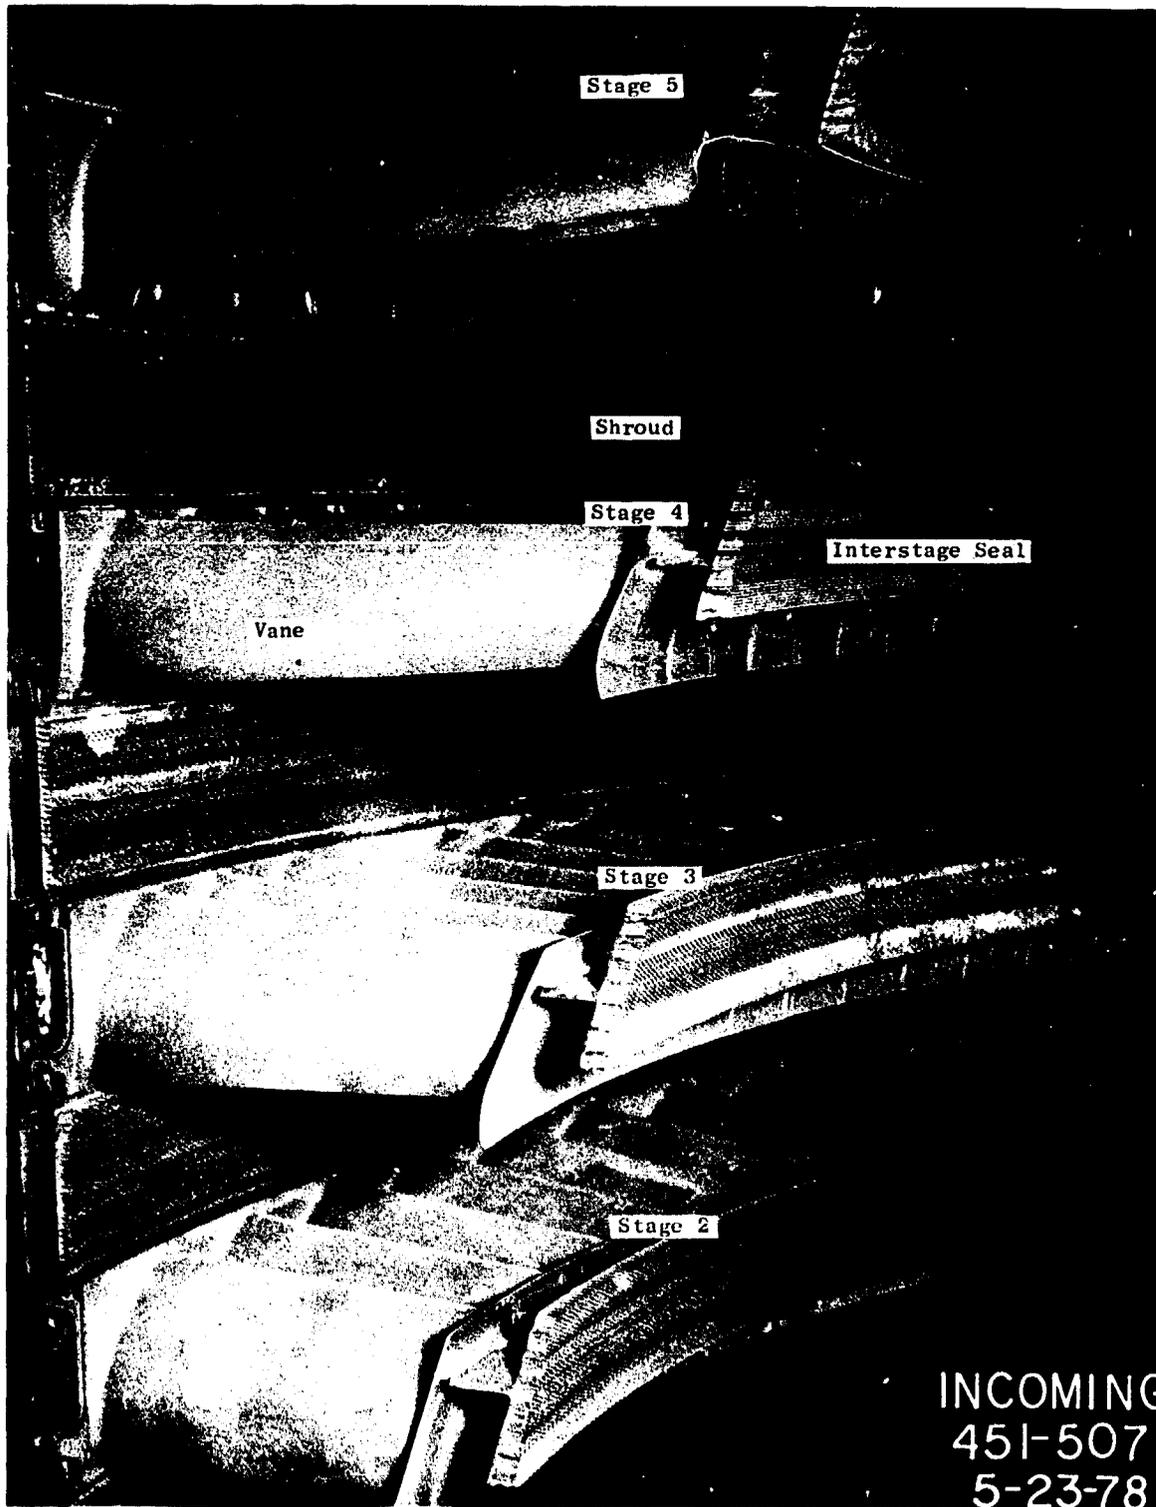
Low Pressure Turbine Stator Assembly - View of Shroud and Seal Rubs.
